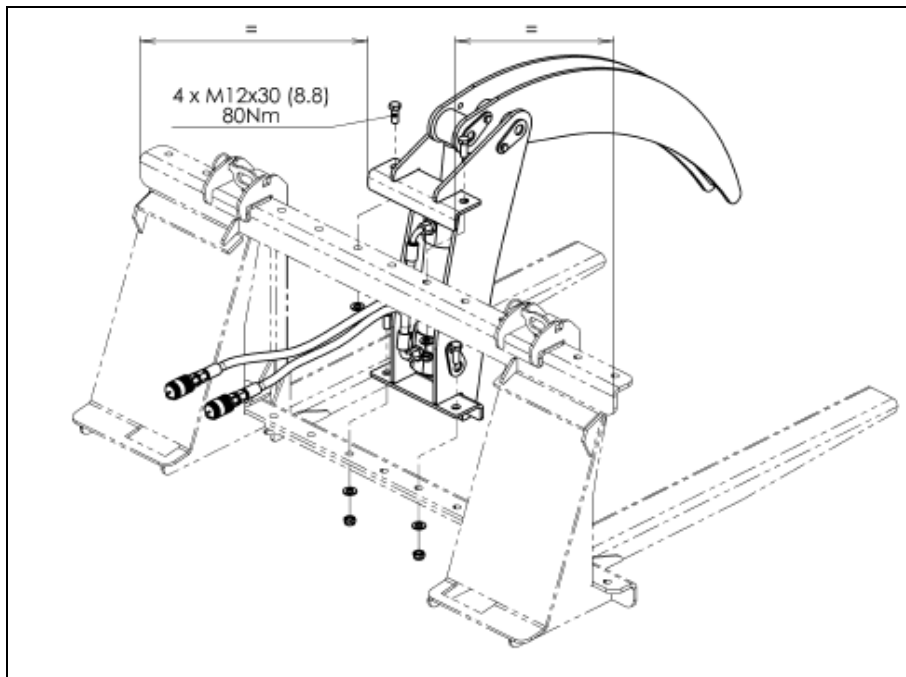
STOLL-Top loading grip FC: Mounting on the pallet fork frame
